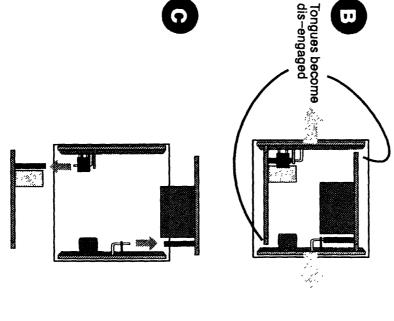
Removing the Output 2 Option PCB/Output 3 Option PCB
